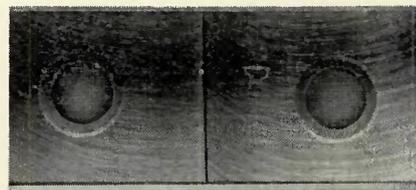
An a set and k set specimen had their nuggets drilled and reamed out before the tensile test. The pressure ring remaining is visible here. It took 635 and 260 lb respectively to pull these pieces from their mate
